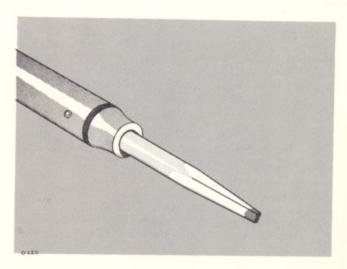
Soldering iron tip correctly shaped and tinned.
